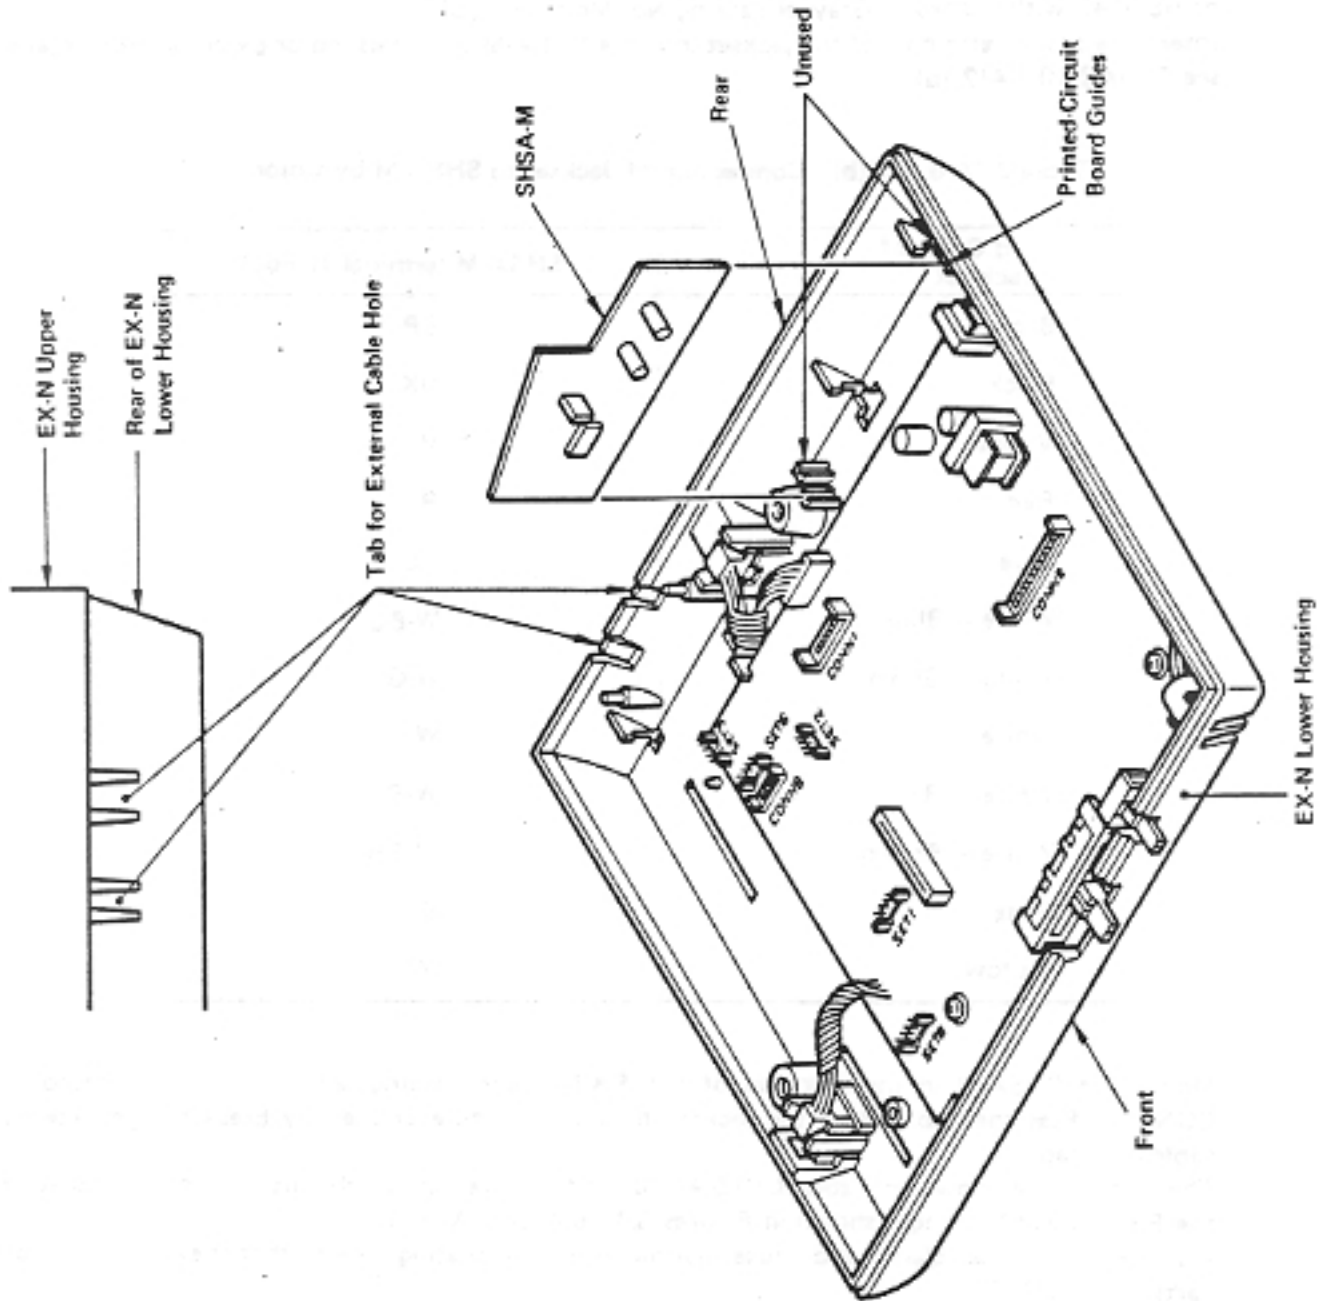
(2)(b) EX824/1648KN1/DN1 Optional Unit Mounting in Lower Housing
